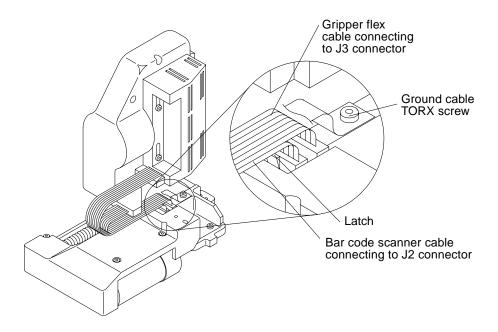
Reconnecting the Gripper Flex and Bar Code Scanner Cables
